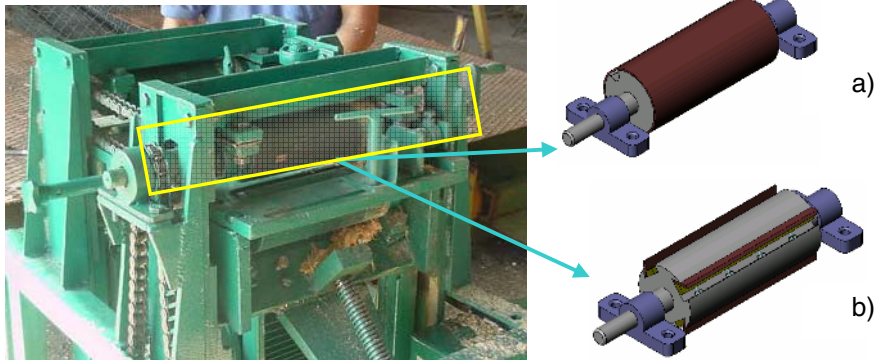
Reconfigurable machine prototype to polishing (a) and planning (b) bamboo
